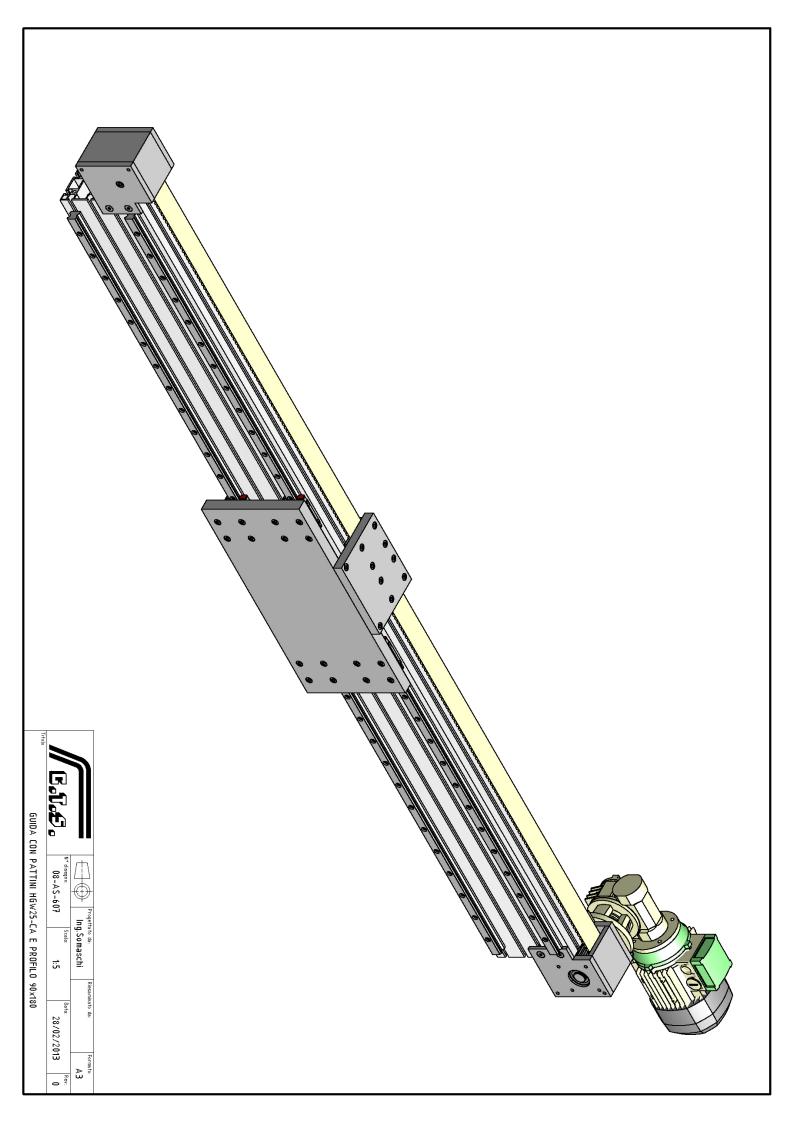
AS-749, 02-AS-554 and 08-AS-607 linear guides with balls (like Hiwin, THK, INA) instead of wheels
